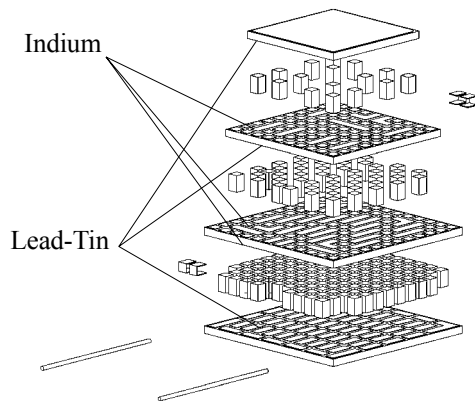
Three-dimensional view of 3MC07-098-115 at the pre-assembly level
